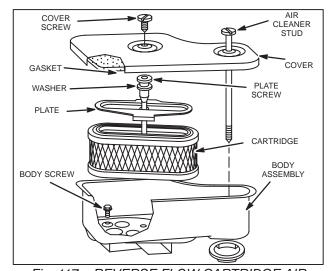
REVERSE FLOW CARTRIDGE AIR CLEANER, VERTICAL CRANKSHAFT
